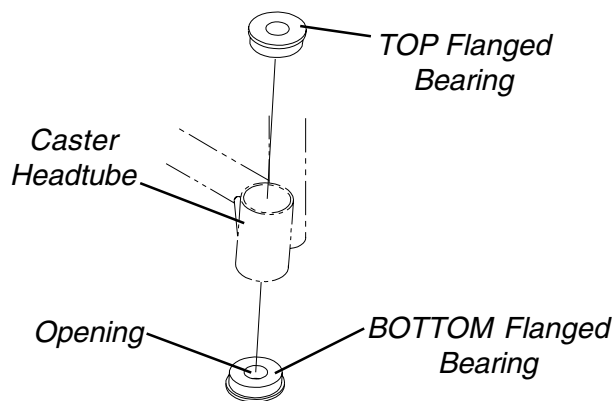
DISASSEMBLING THE EXISTING FORK/STEM ASSEMBLY
